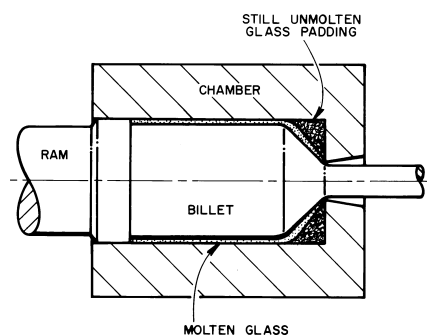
Steel extrusion by Ugine-Sejournet process.
